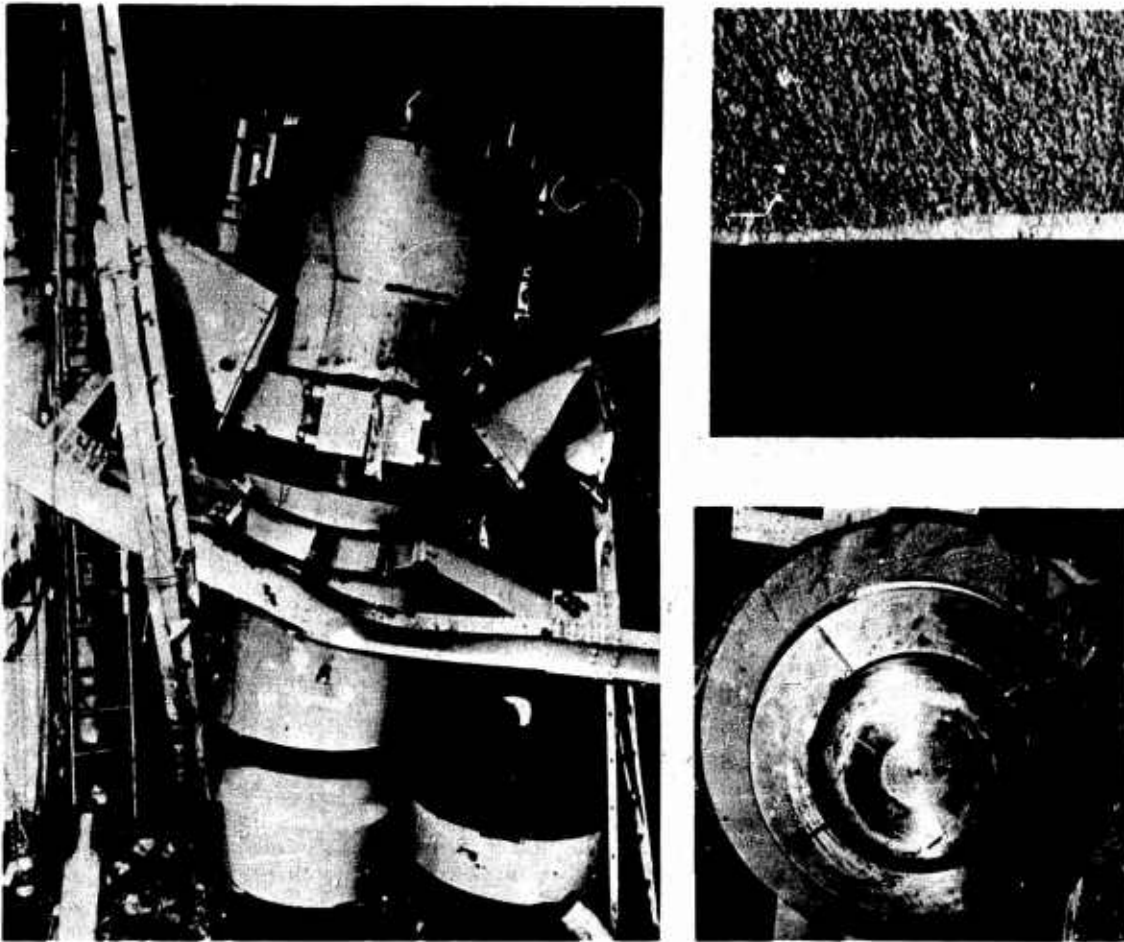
Fracture of massive ring forging (12 x 13 in. cross-section dimension) caused by tiny cracks subjected to high residual stress. The dark spot in the smooth region of the fracture (upper right corner) marks the position of a thermocouple braze which contained tiny cracks. Note a companion thermocouple near this point.
